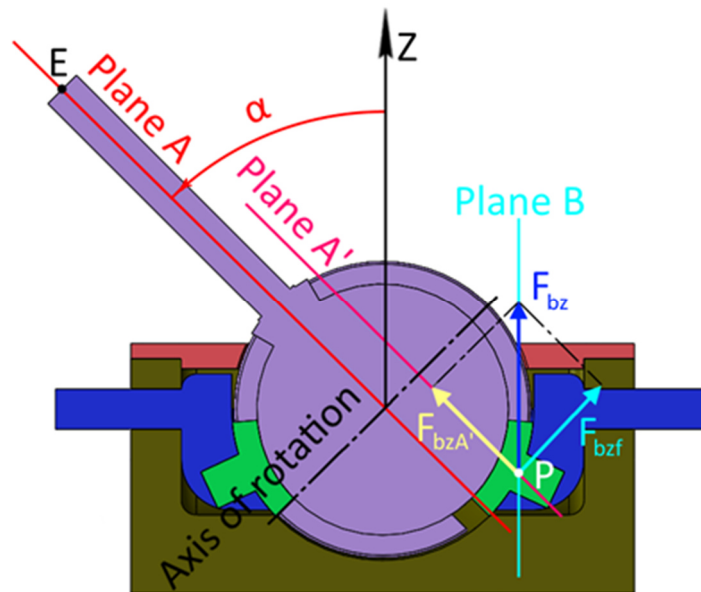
Planes and forces in the joint; cross-section in the YZ plane.
